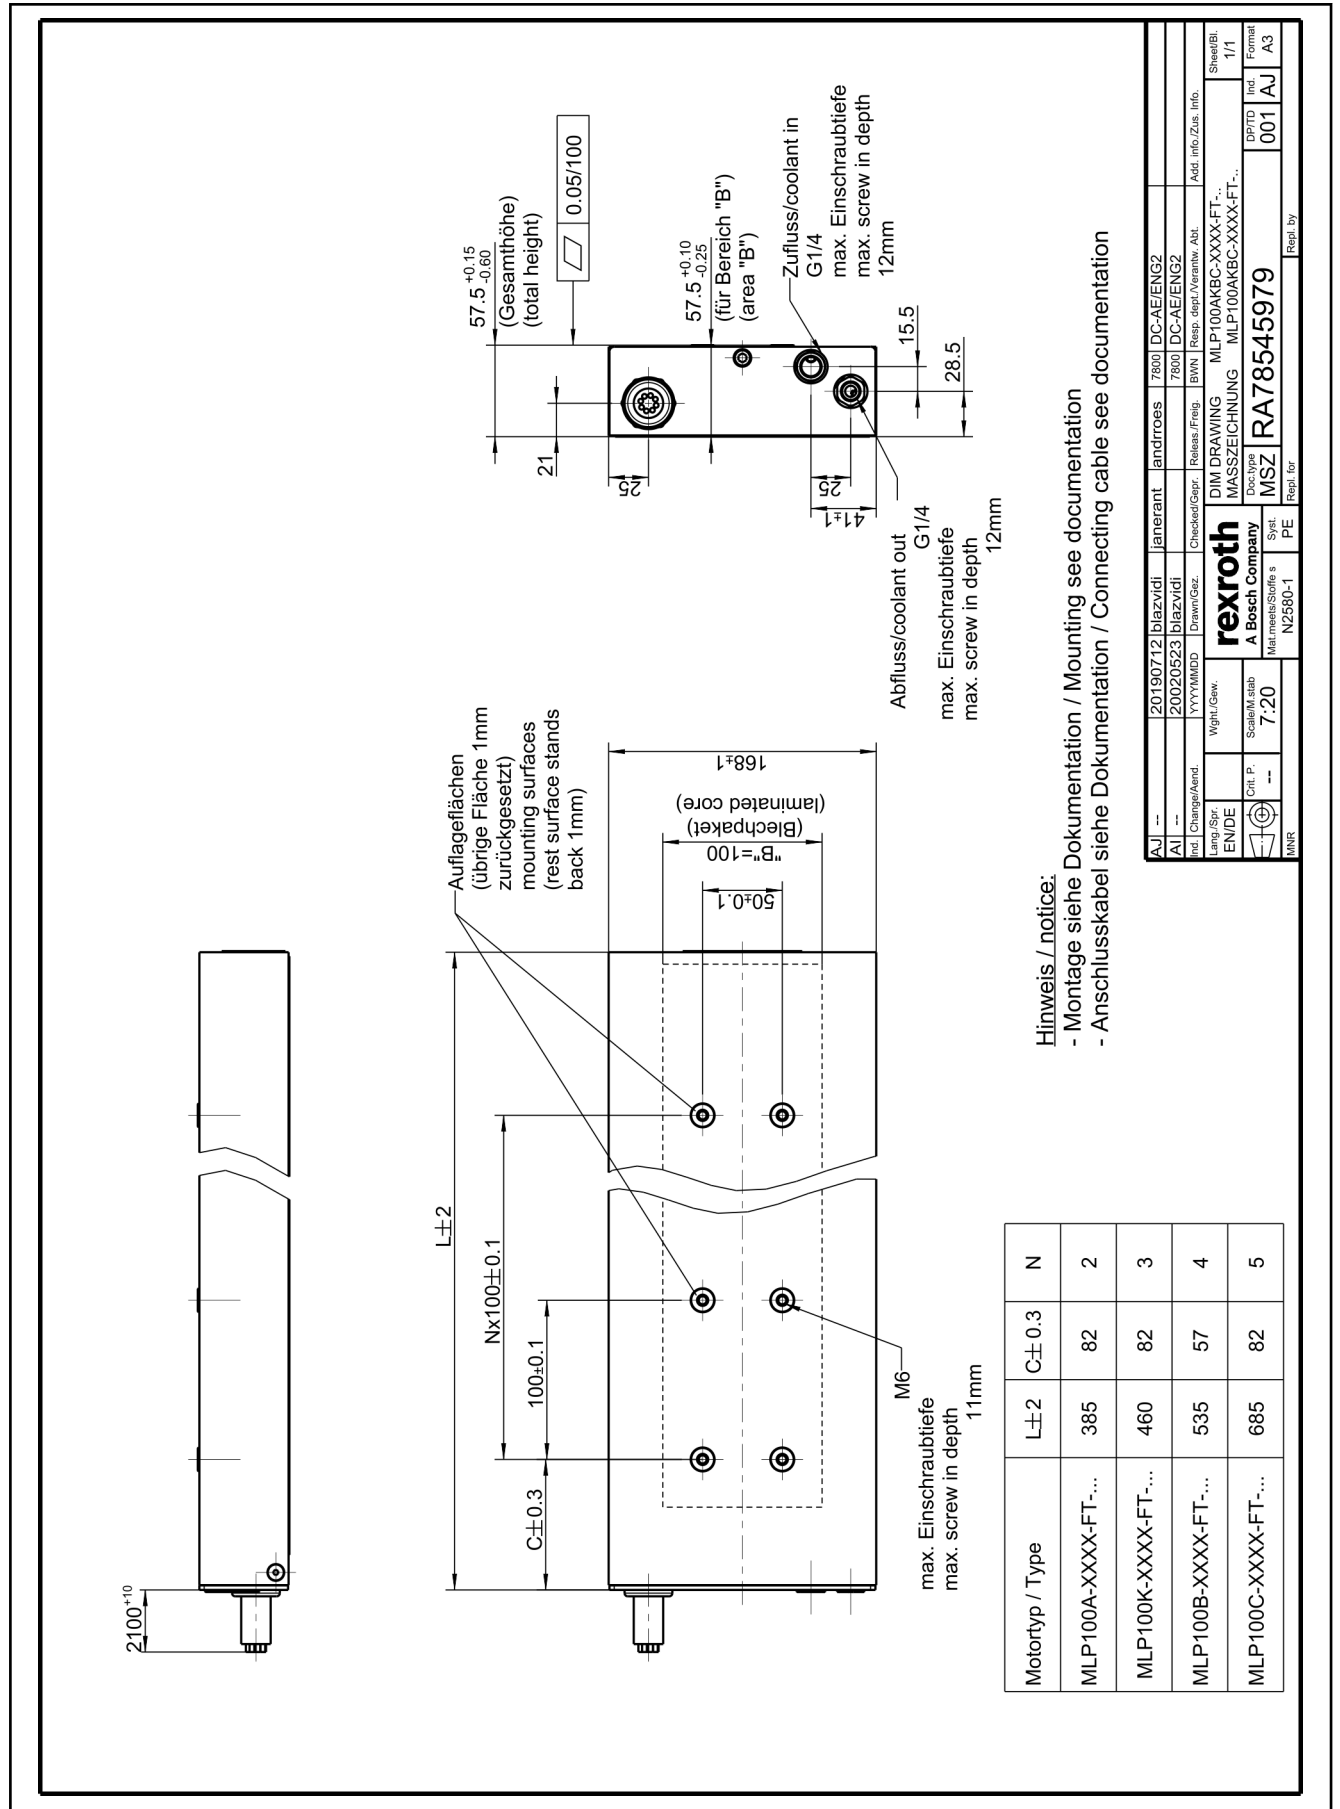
Primary part MLP100 with thermo encapsulation
